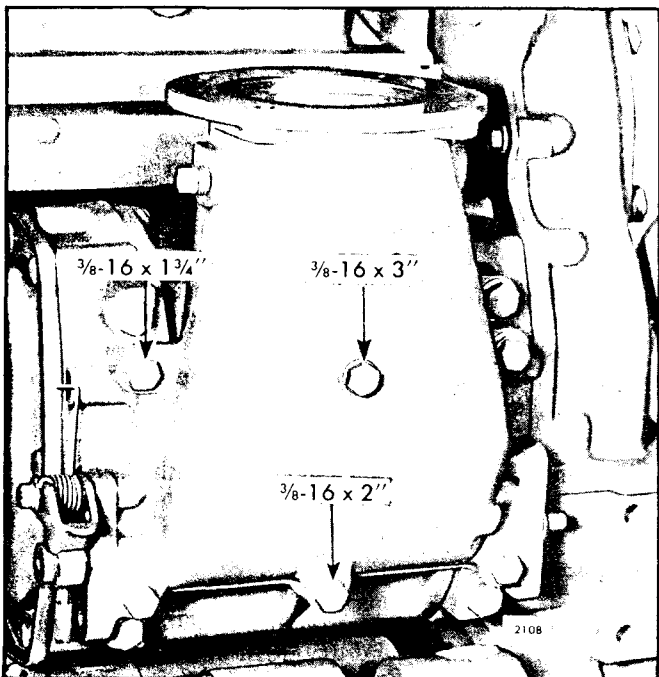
Location of Air Shut-Down Housing Mounting Bolts (In-Line Engines)
